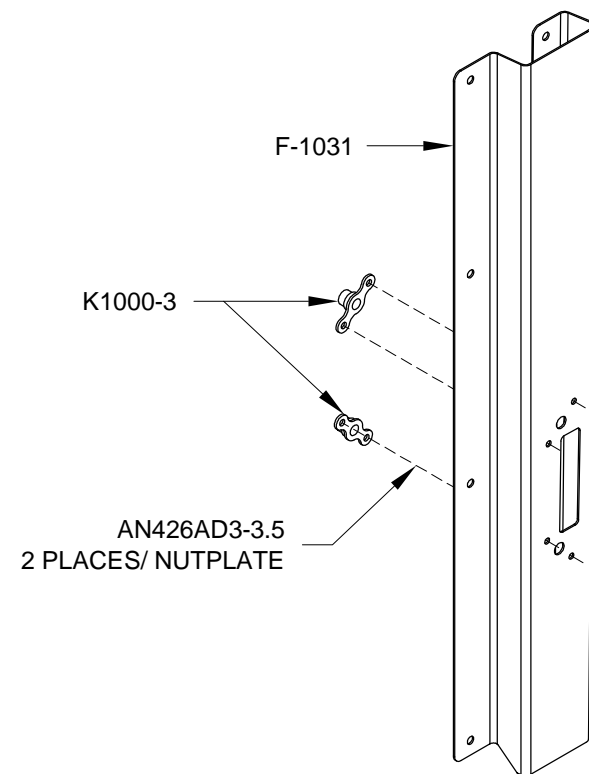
RIVETING NUTPLATES TO THE UPPER BAGGAGE DOOR SEAL CHANNEL
